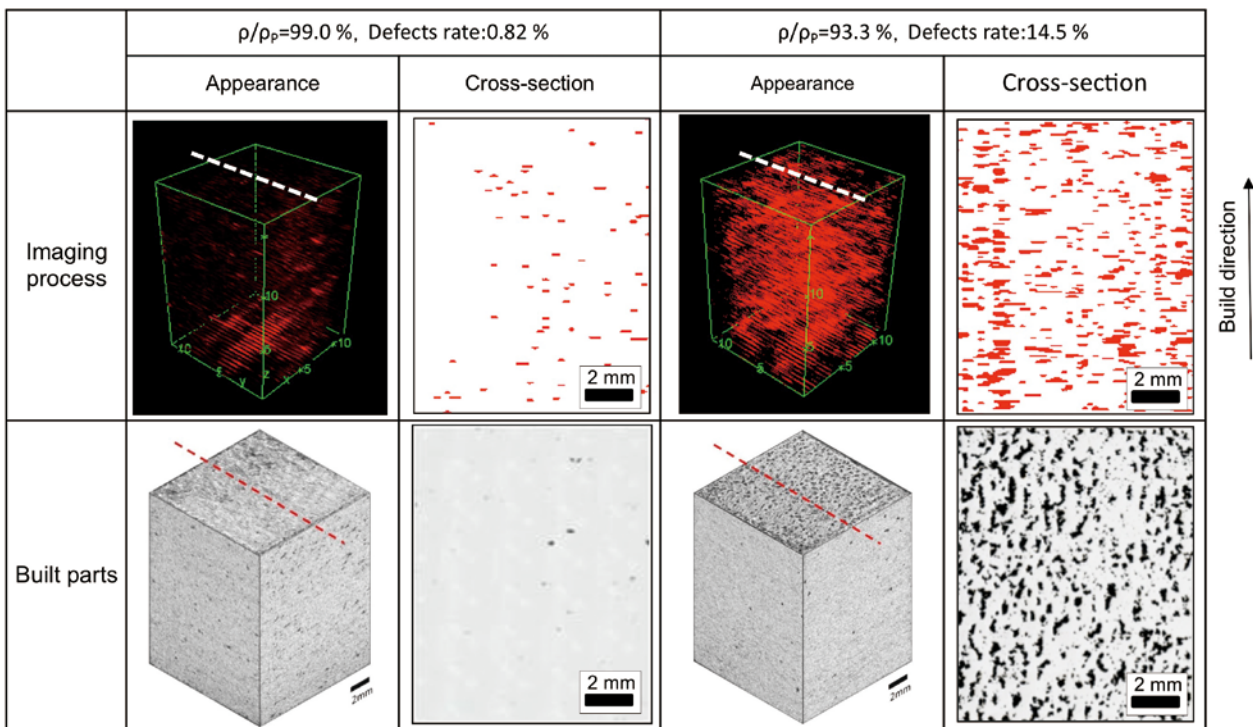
Appearance and cross-section of both defects by imaging processing and built parts (Powder B).
